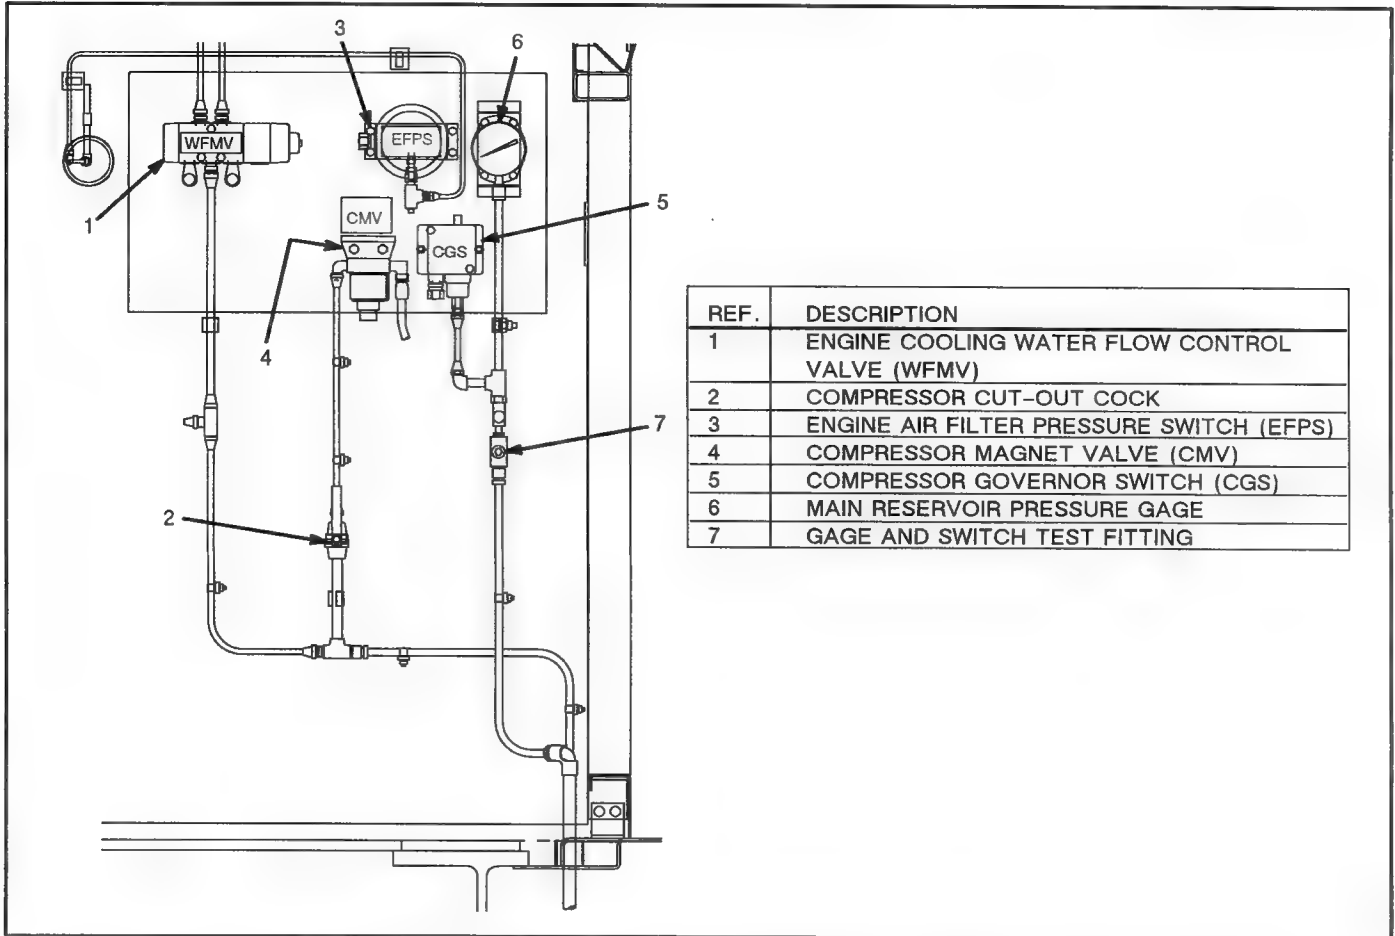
AIR COMPRESSOR CONTROL PANEL, ENGINE AIR FILTER PRESSURE SWITCH AND ENGINE COOLING WATER FLOW CONTROL VALVE AND PRESSURE REGULATOR. E-34091A.
